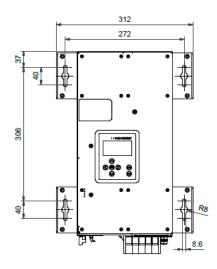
Dimensions [mm] drill-pattern for wall-mount (book and flat mounting)
